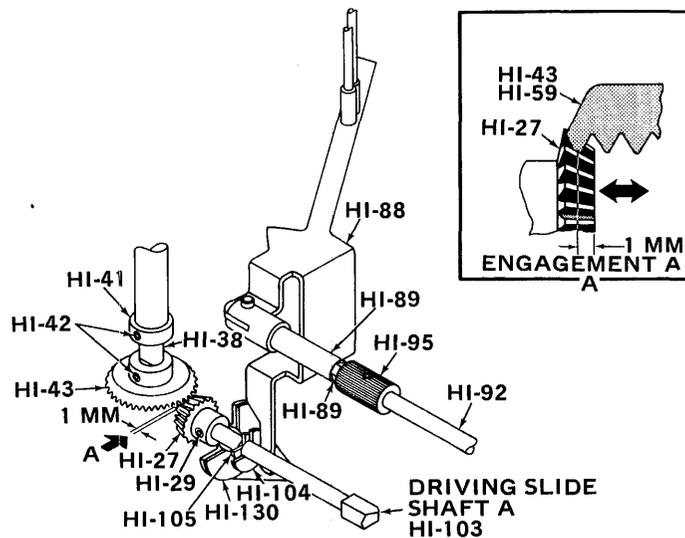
RIBBON FEED MECHANISM (REAR OF PRINTER, LEFT SIDE)
